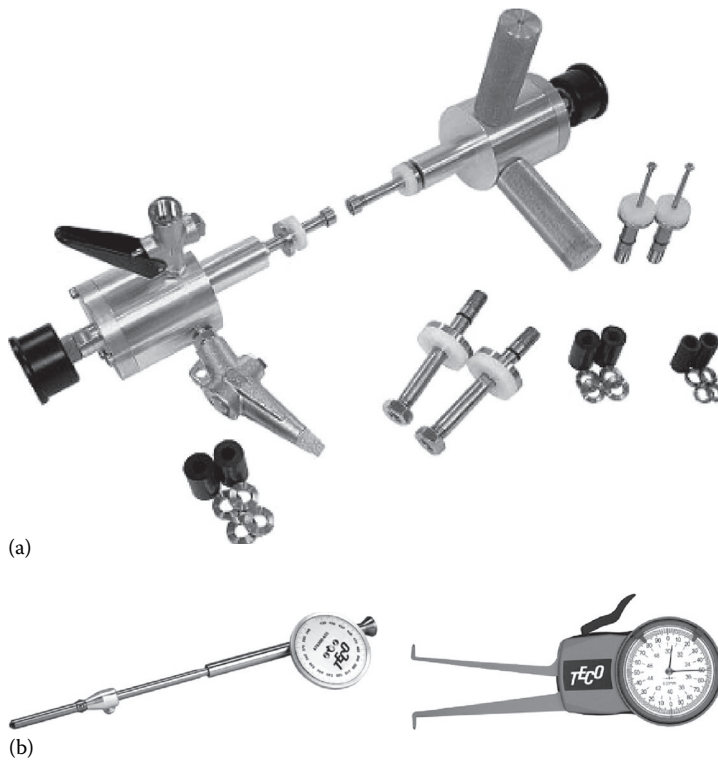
Accessories for inspection of rolled tube. (a) Tube testing gun set and (b) gauges used for checking holes—hole gauge and internal measuring gauge. (Courtesy of TECO Tube Expanders Company, Leiderdorp, the Netherlands.)
